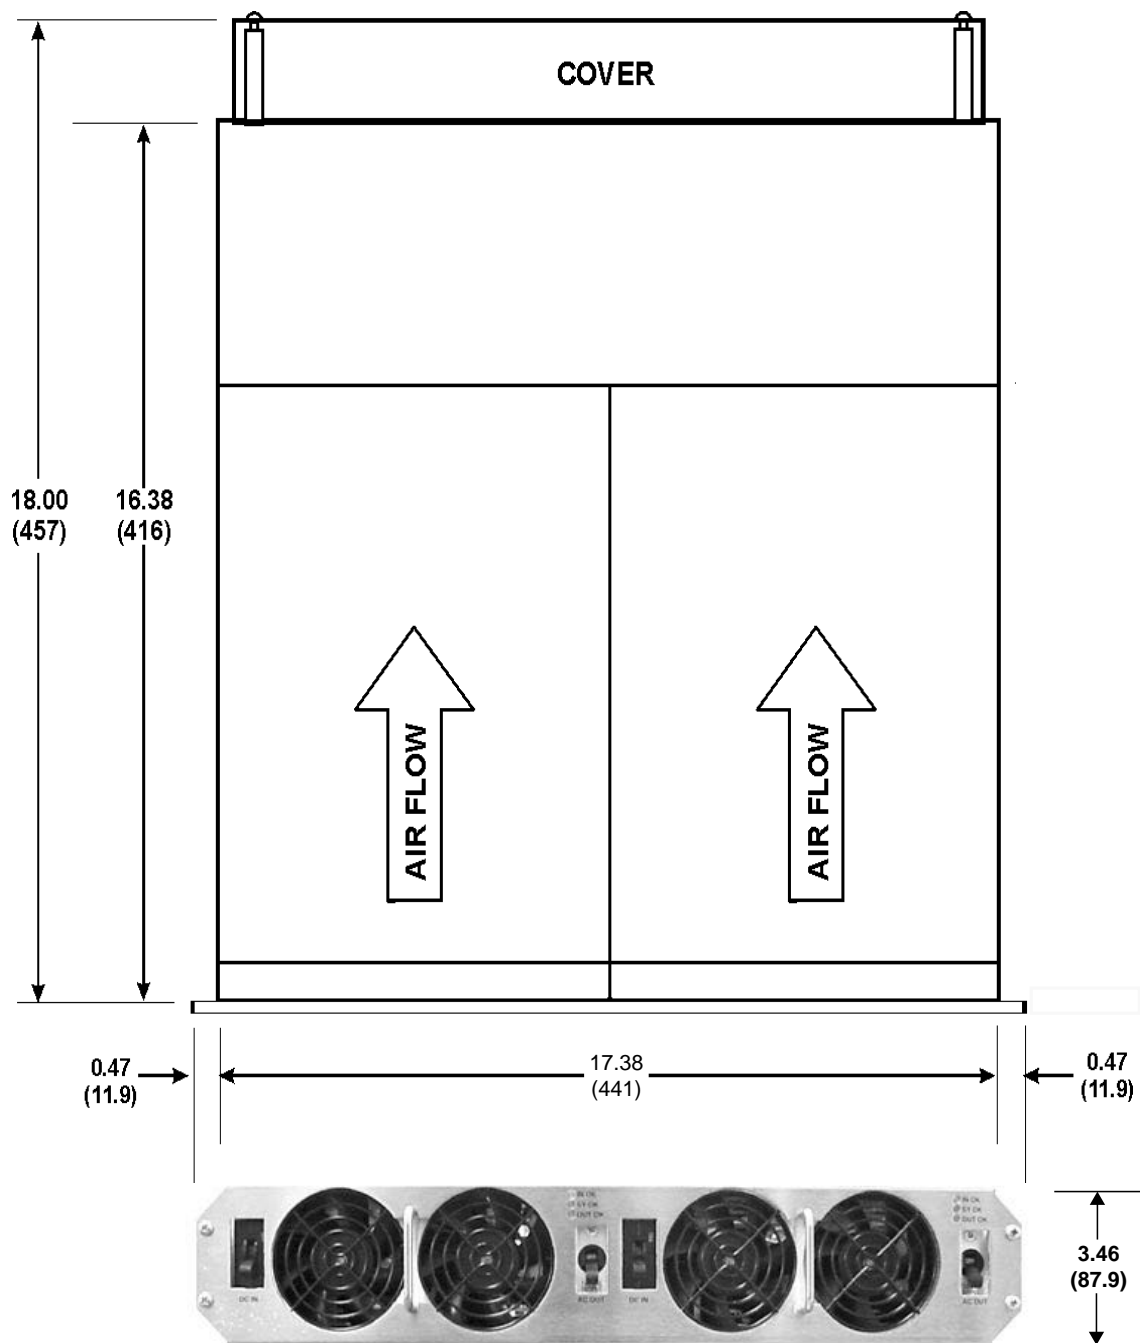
Mechanical Dimensions of INVR2U-HS Shelf
